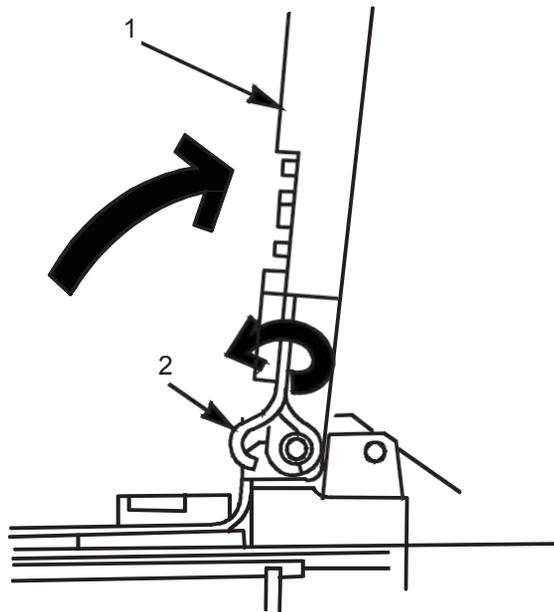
Cover and Feed Mechanism Assembly, Retaining Pin.
